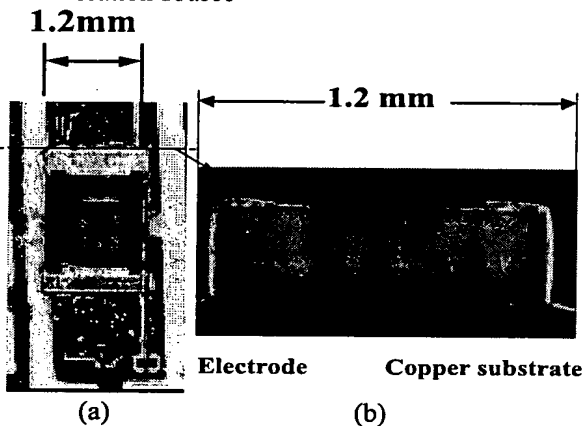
Welded conditions of (a) a tip resistor (1.2 mm x 2.0 mm) welded to a solder-plated substrate, (b) Cross section of a tip resistor welded to a copper substrate using a complex vibration system.
